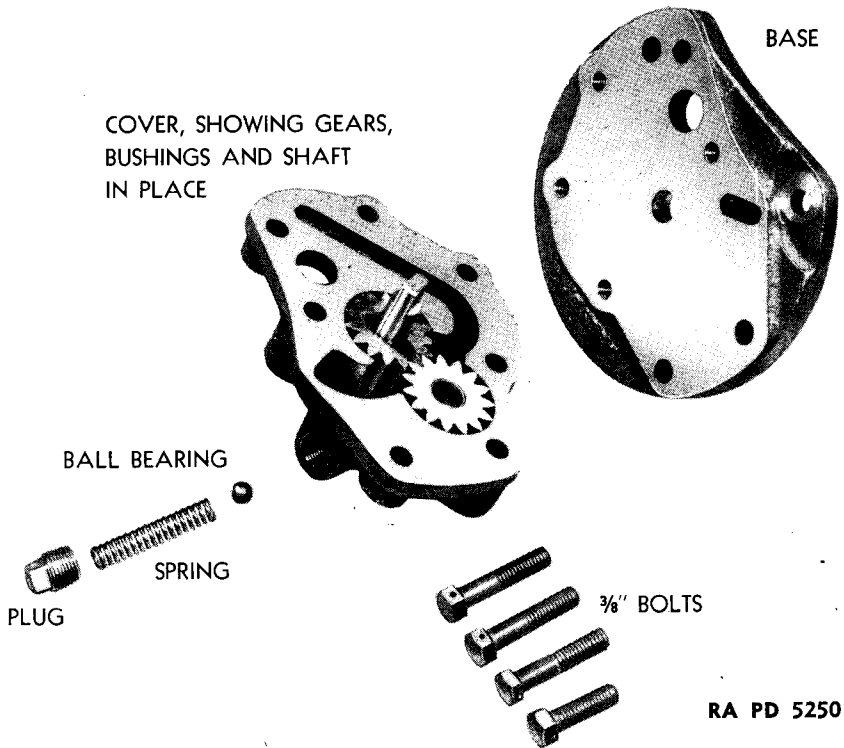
WORKING PARTS IN OIL PUMP EQUIPPED WITH OIL COOLER
